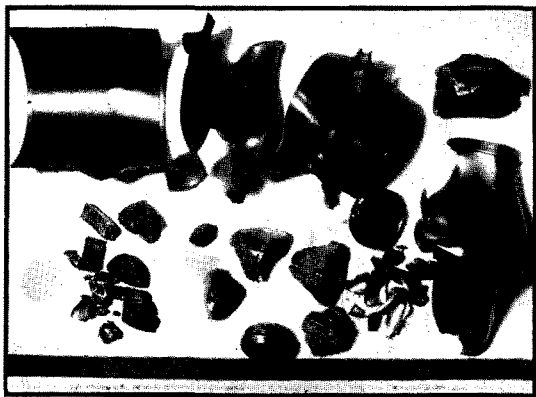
Photograph of metal rotors and vacuum chambers after explosion. At right are parts of an exploded steel tube.
